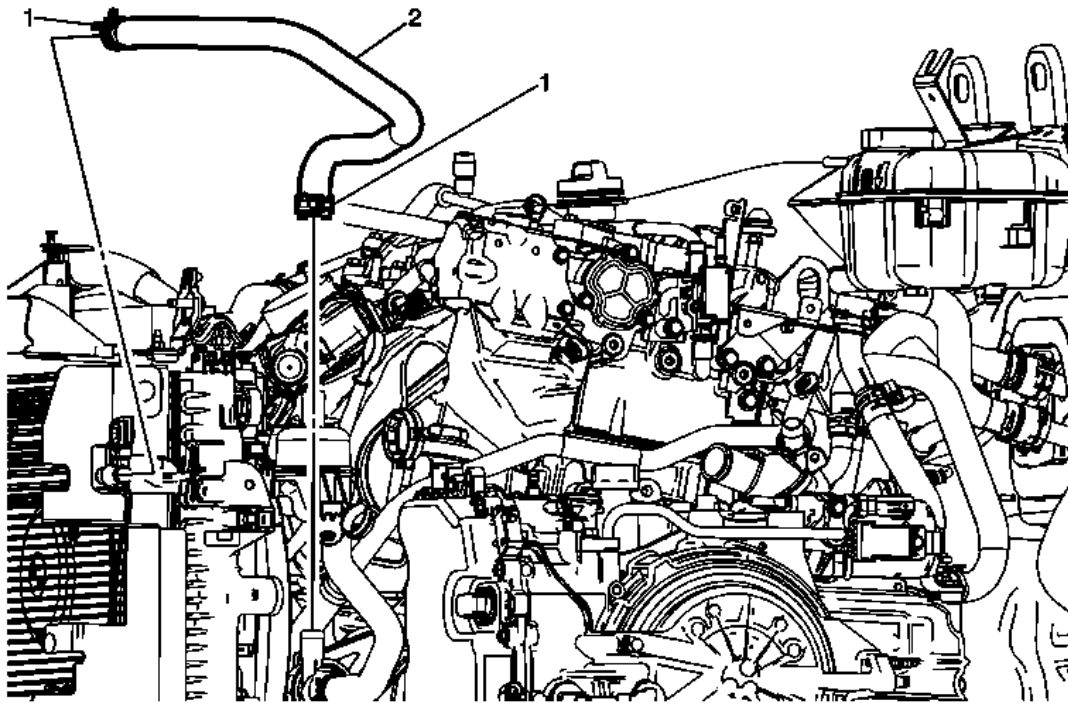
Auxiliary Radiator Inlet Hose & Clamps
